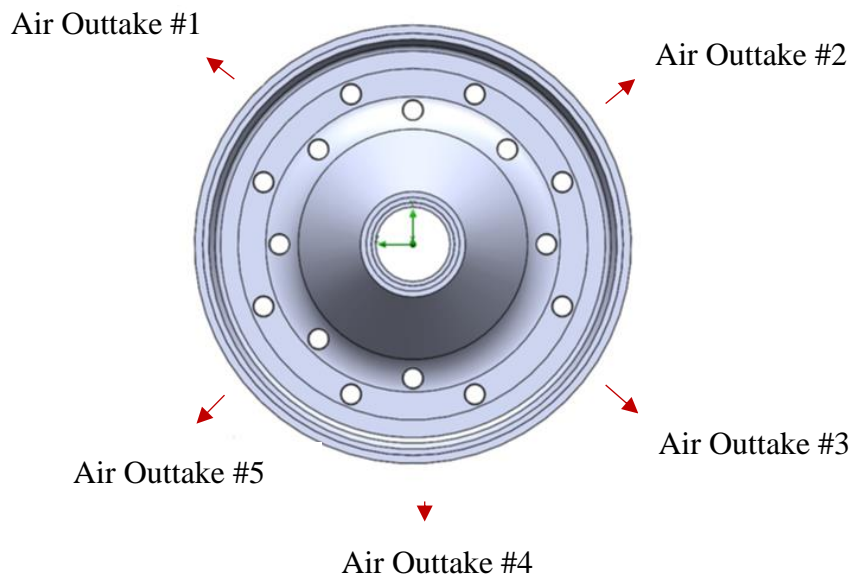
Hot Air Exit Channels of the Motor on End of Frame
